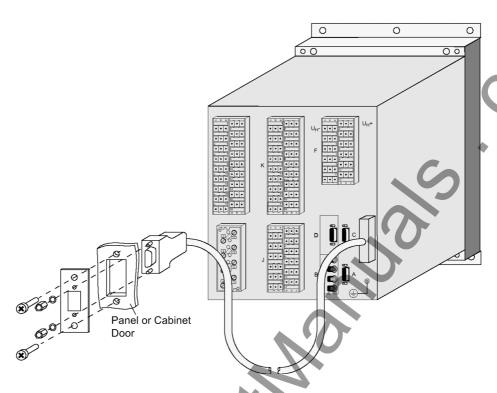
Plugging the subminiature connector of the dongle cable into the control panel or cabinet door (example housing size 1/2)
